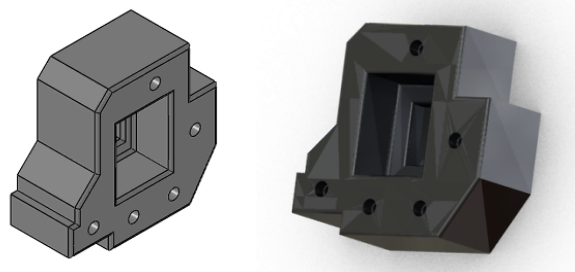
Workpiece used in example, contains operations of milling, drilling
